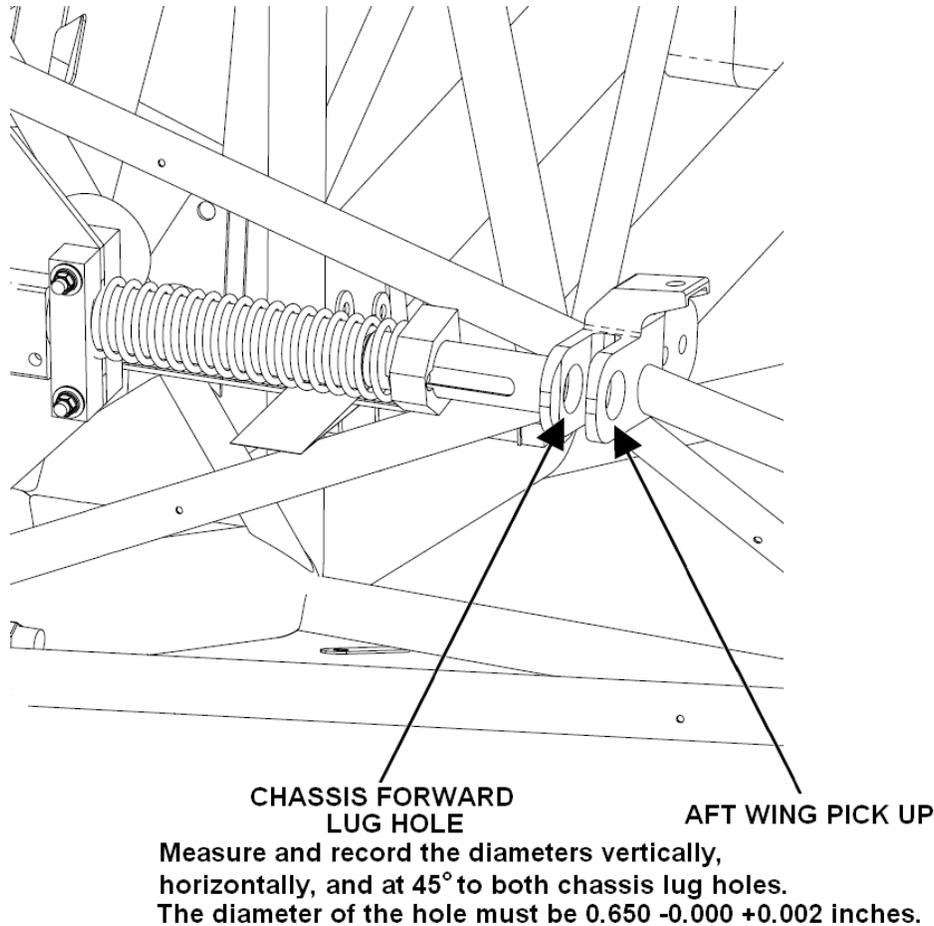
Measurement of the Aft Wing Clevis Pin Weldment
